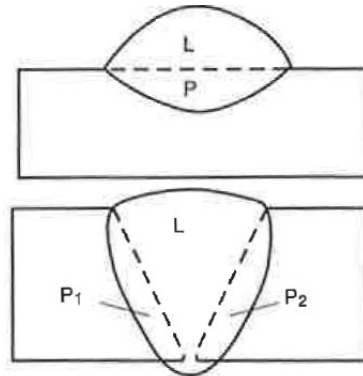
Mixing for bead-on-plate and butt welds (edited picture). (1)
